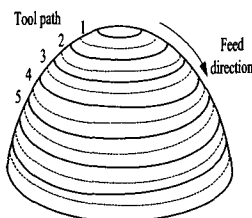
Measured position of tool path for ball end mill cutter at convex surface
